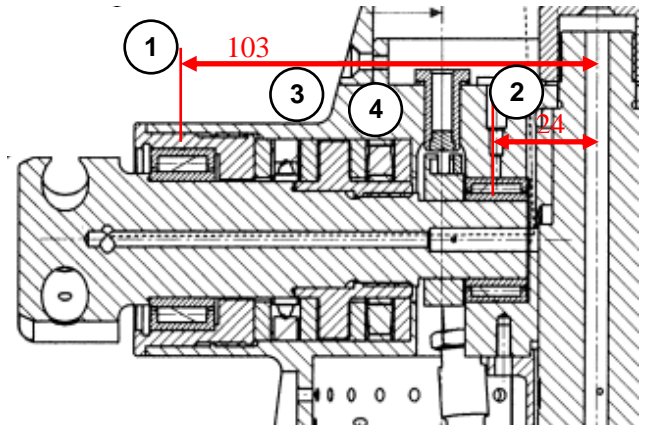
Blade shaft bearing positions #1 and #2 are radial needle type bearings and #3 and #4 are axial cylindrical roller bearings
